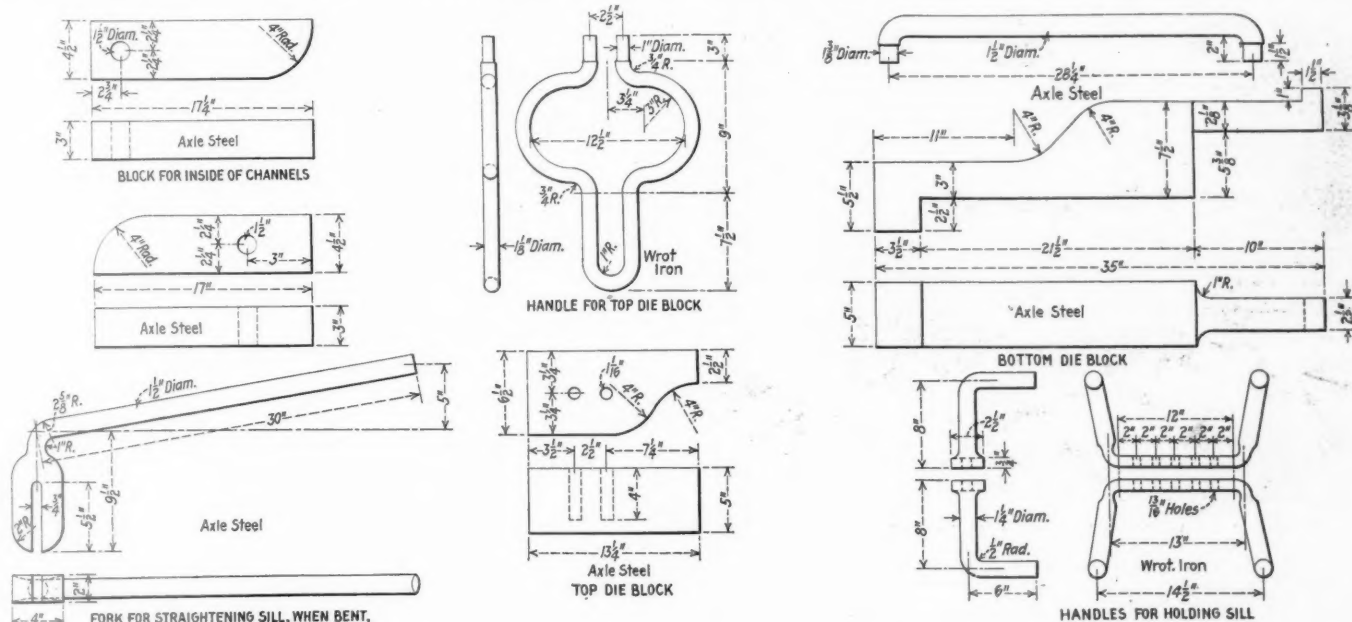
Details of Formers Used for Bending End Sill for Standard Motor Truck
